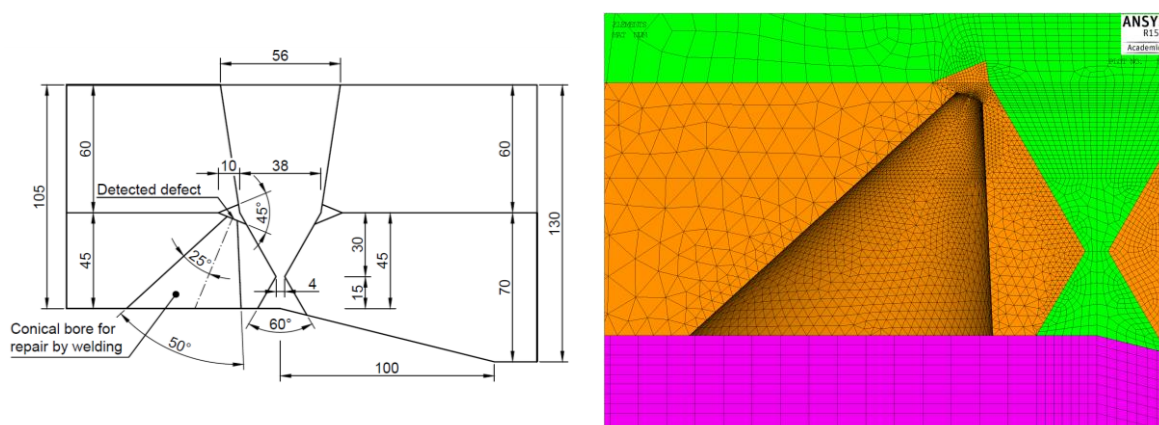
Schema of repair of sealing weld defected defect (left), FEM model of conical bore hole used for defect repair by welding (right)
